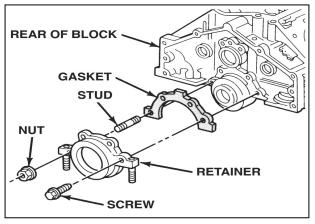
Crankshaft Rear Oil Seal Housing and Components
